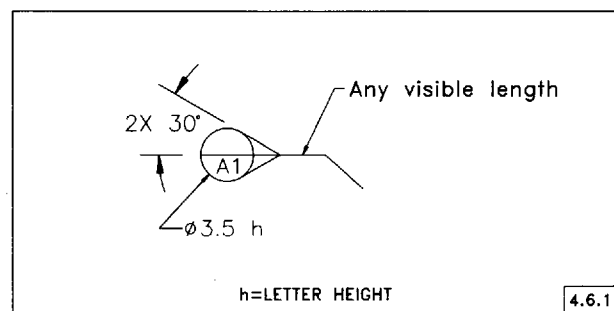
(b) MOVABLE DATUM TARGET SYMBOL FORM AND PROPORTION
